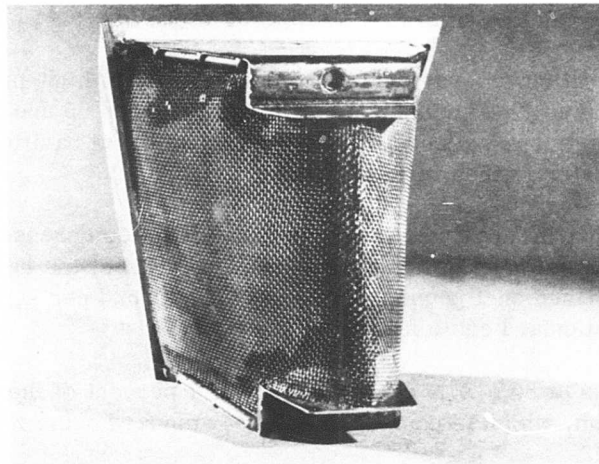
Cold-Side Inlet View of Straight Radial Vee Matrix.
